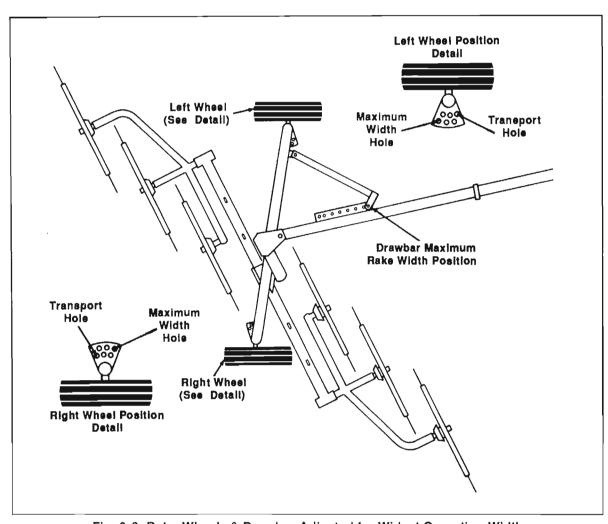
Rake Wheels & Drawbar Adjusted for Widest Operating Width
